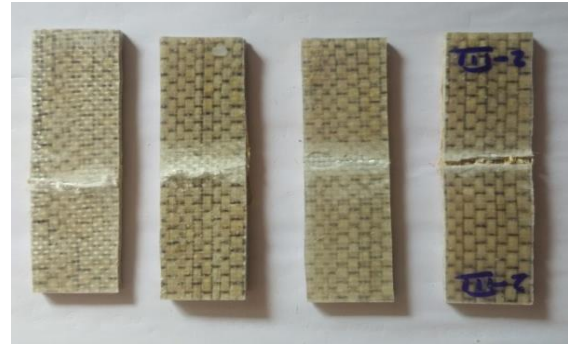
Impact test specimens before fracture Figure. 3.2.2 Impact test specimens after fracture
